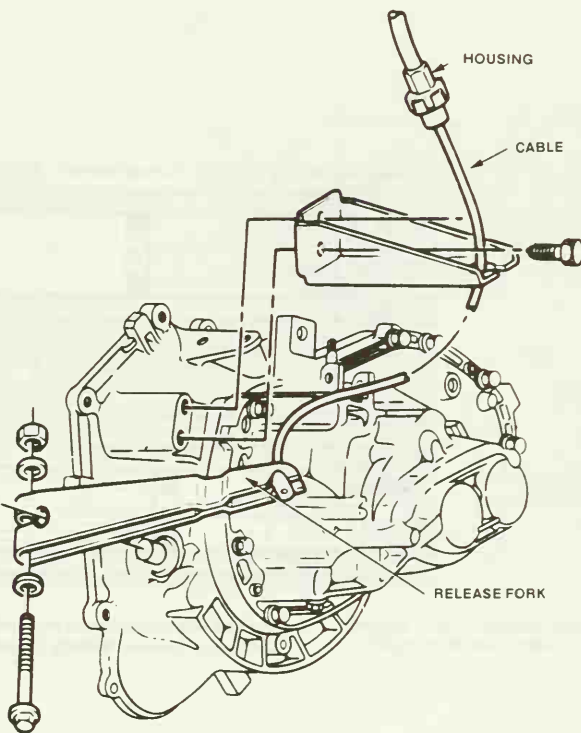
The clutch pedal movement may be transferred through a cable to the release mechanism. (Chevrolet Motor Division of General Motors Corporation)
